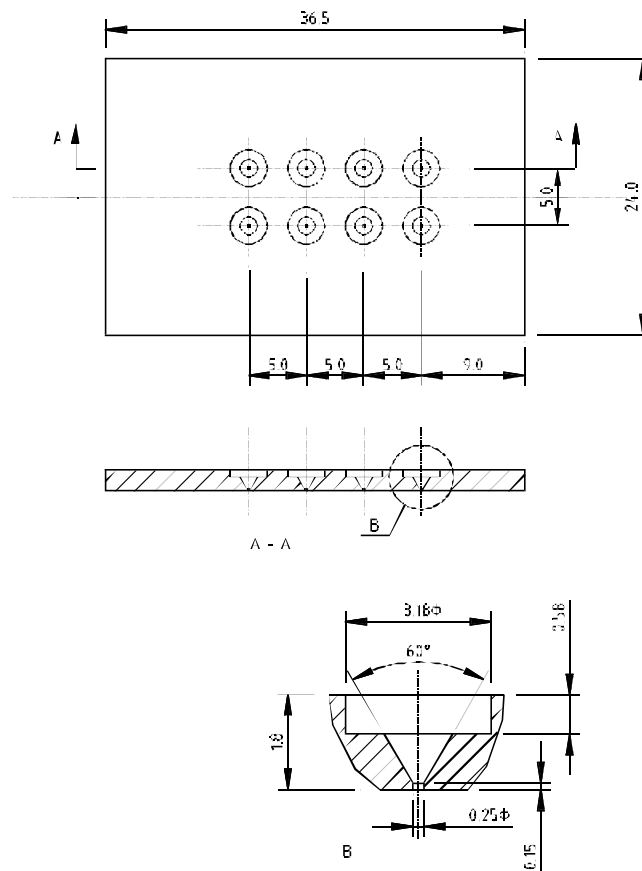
Multi-nozzle plate (dimensions in mm).
